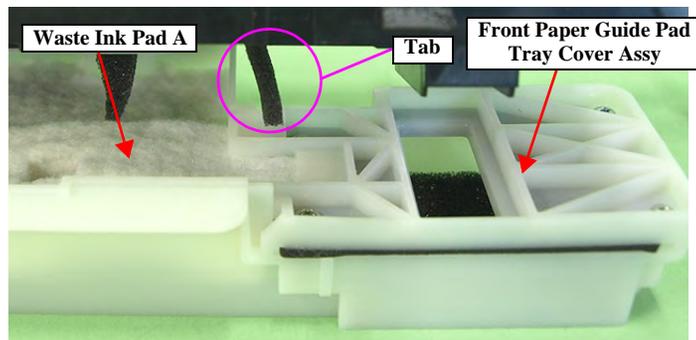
Reinstalling the Front Paper Guide Pad Tray
